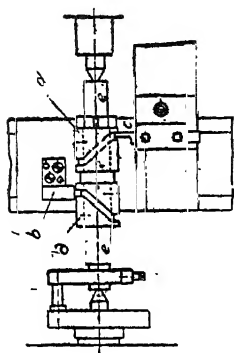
Turning of a cylindrical cam in a lathe, according to a template or master cam : *a*, template ; *b*, tracer pin, mounted in bracket on longitudinal slide ; *c*, turning tool ; *d*, workpiece (cylindrical cam) ; *e*, common arbor.
